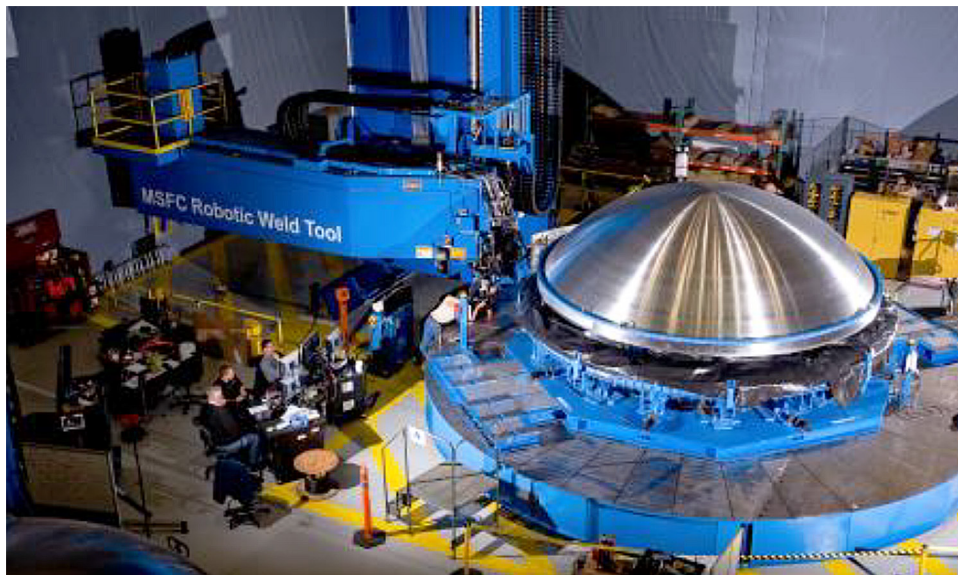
Tank dome on MSFC's robotic weld tool.
